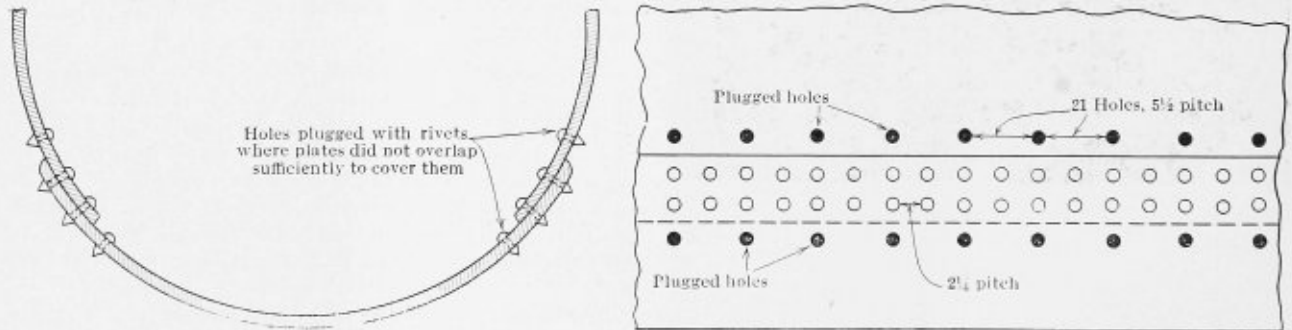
Details of Lap Joint with Useless Holes Plugged
